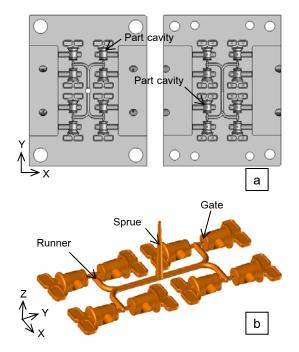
CAD models of: (a) parting plan with cavities and (b) patterned parts with sprue, gate and runner
